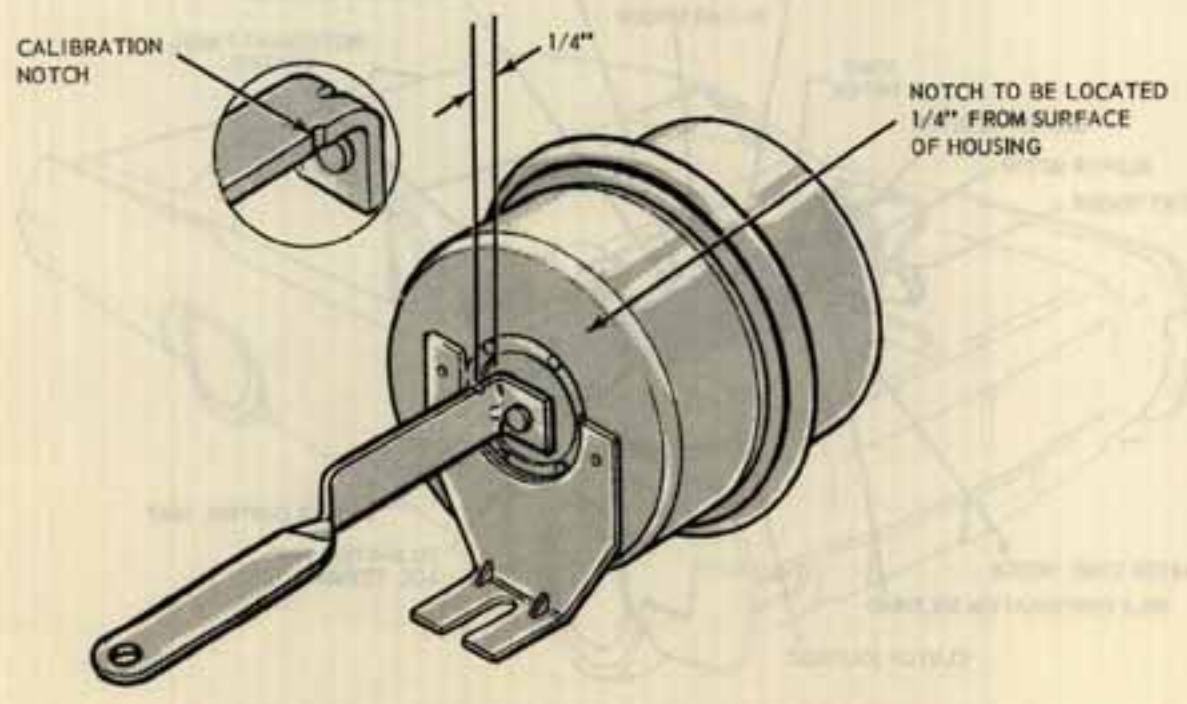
Temperature Blend Door Vacuum Motor Adjustment
